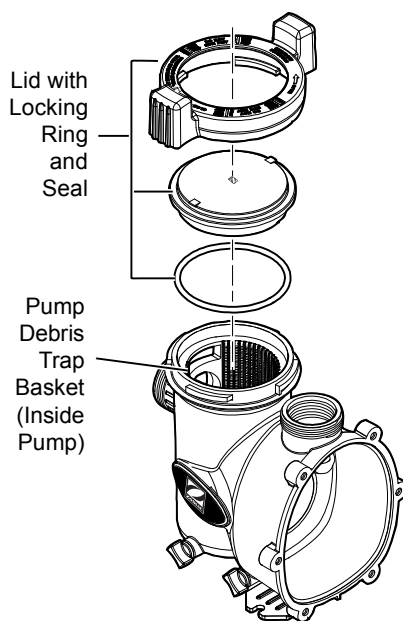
EXPLODED VIEW OF LID ASSEMBLY
